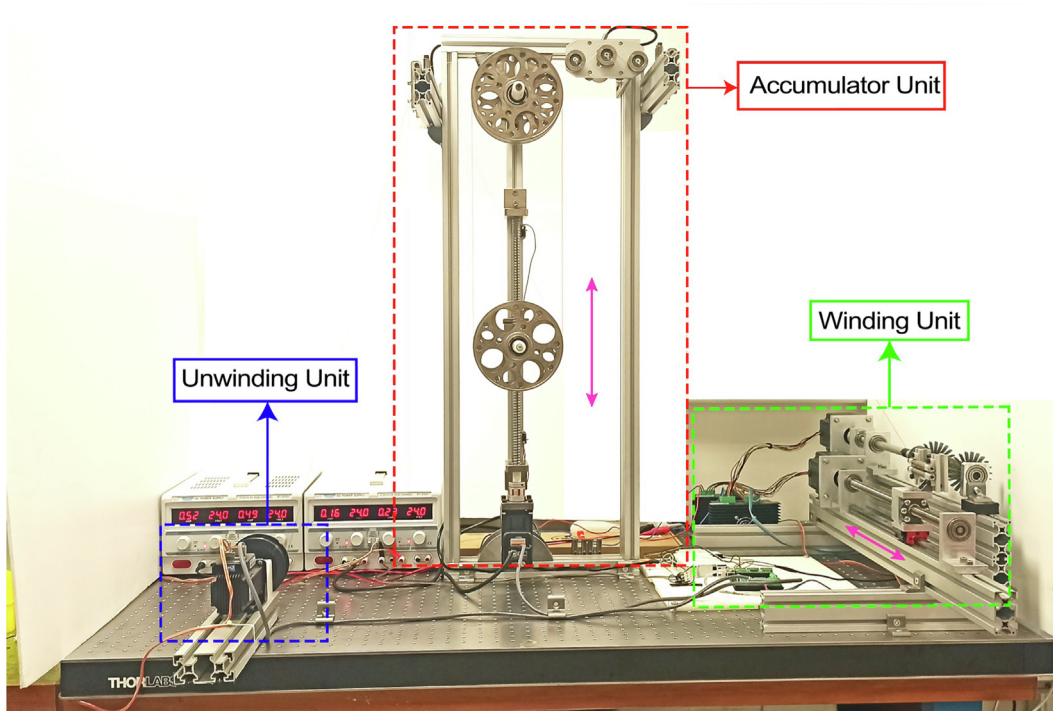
Overview of the fiber winding machine. The system has three main parts: the unwinding, accumulator, and winding unit. Two DC power supplies are used to provide the required power for the motors and the tension sensor. The machine winds the fibers on the outer diameters of a specifically designed mandrel. The whole machine is placed on a firm table to reduce the vibrations caused by the movements of wagons. The movements are shown by the arrows.
